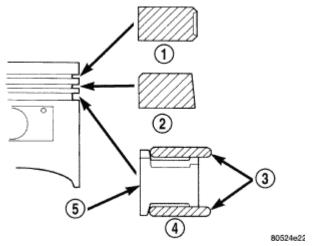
Piston Ring Installation Courtesy of CHRYSLER LLC
